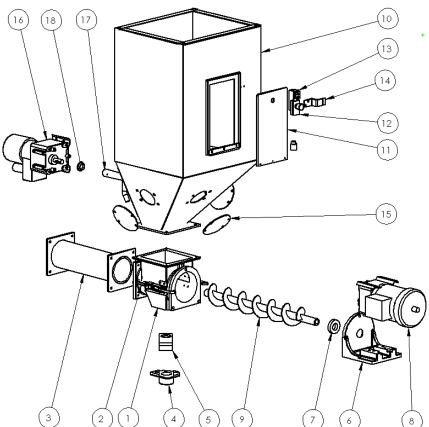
Typical R.A.M. Hopper Assembly Parts List
